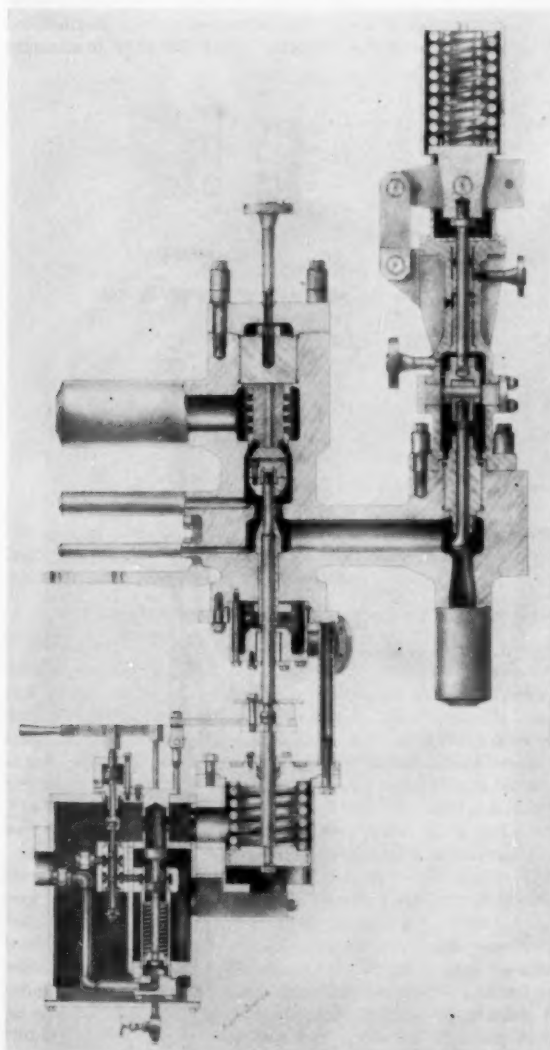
CROSS SECTION OF STOP VALVE AND COMPANION CONTROL VALVE
